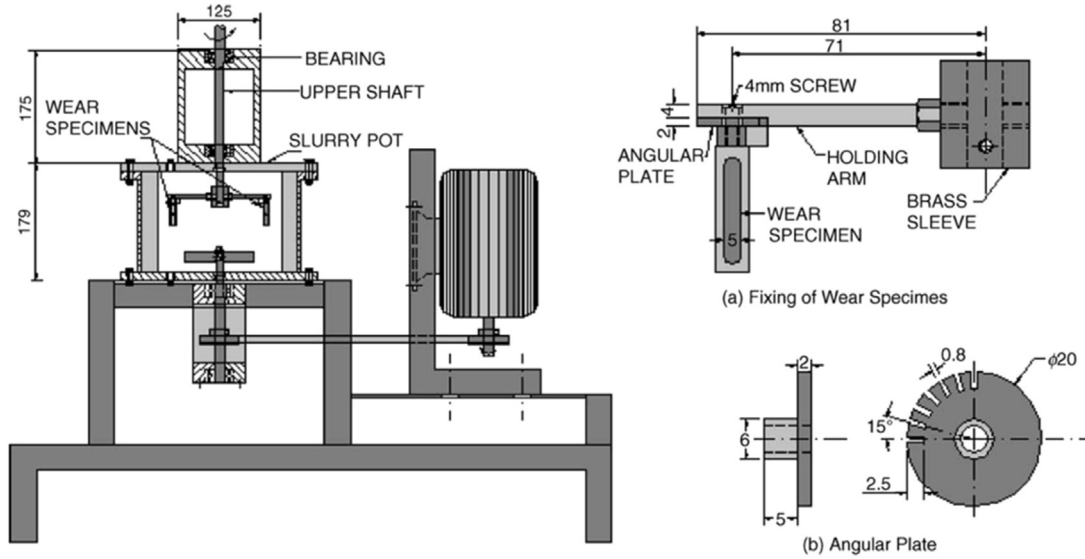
Schematic illustration of improved pot tester: (a) fixing of wear specimens; (b) angular plate [124].
